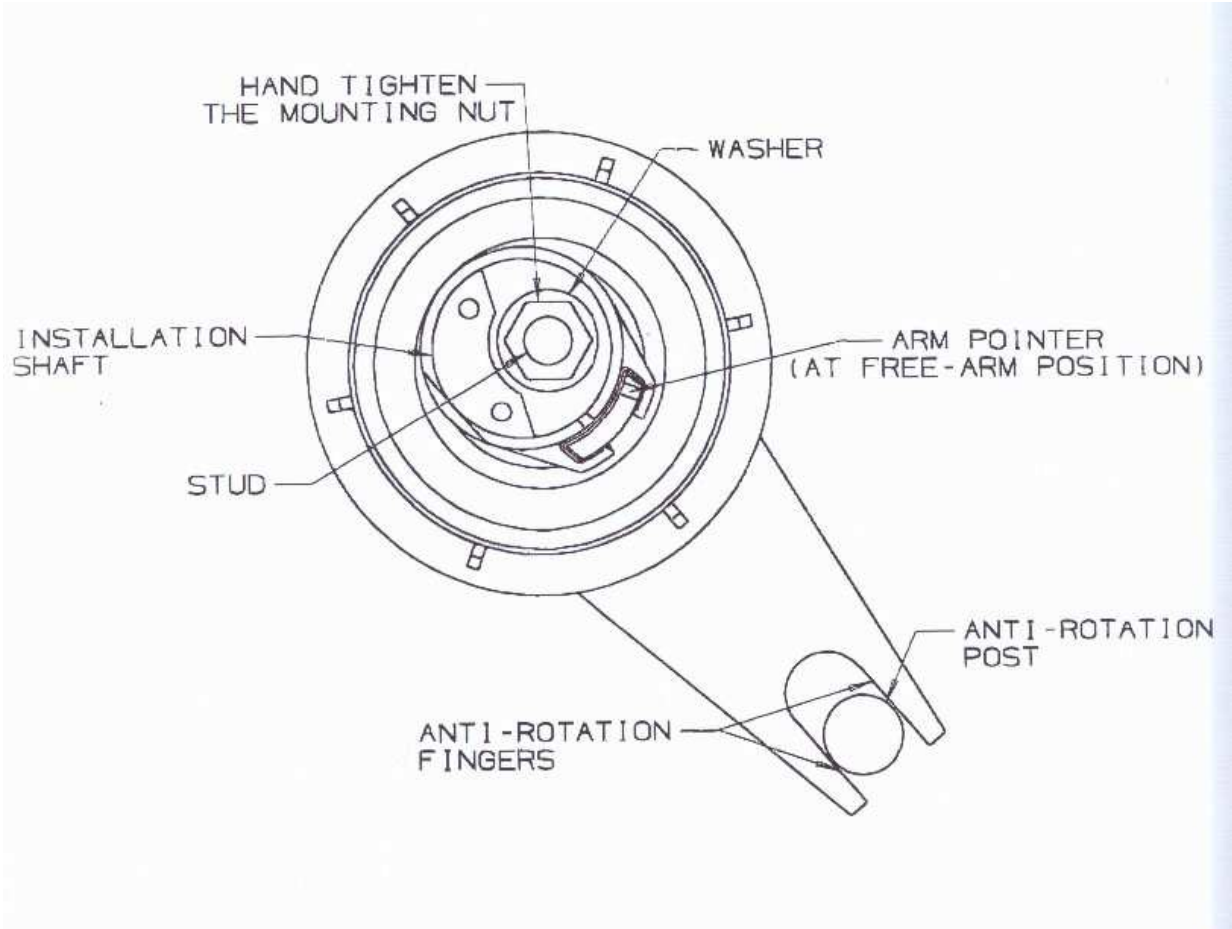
Tensioner shown at Free-Arm position placed on the mounting surface
